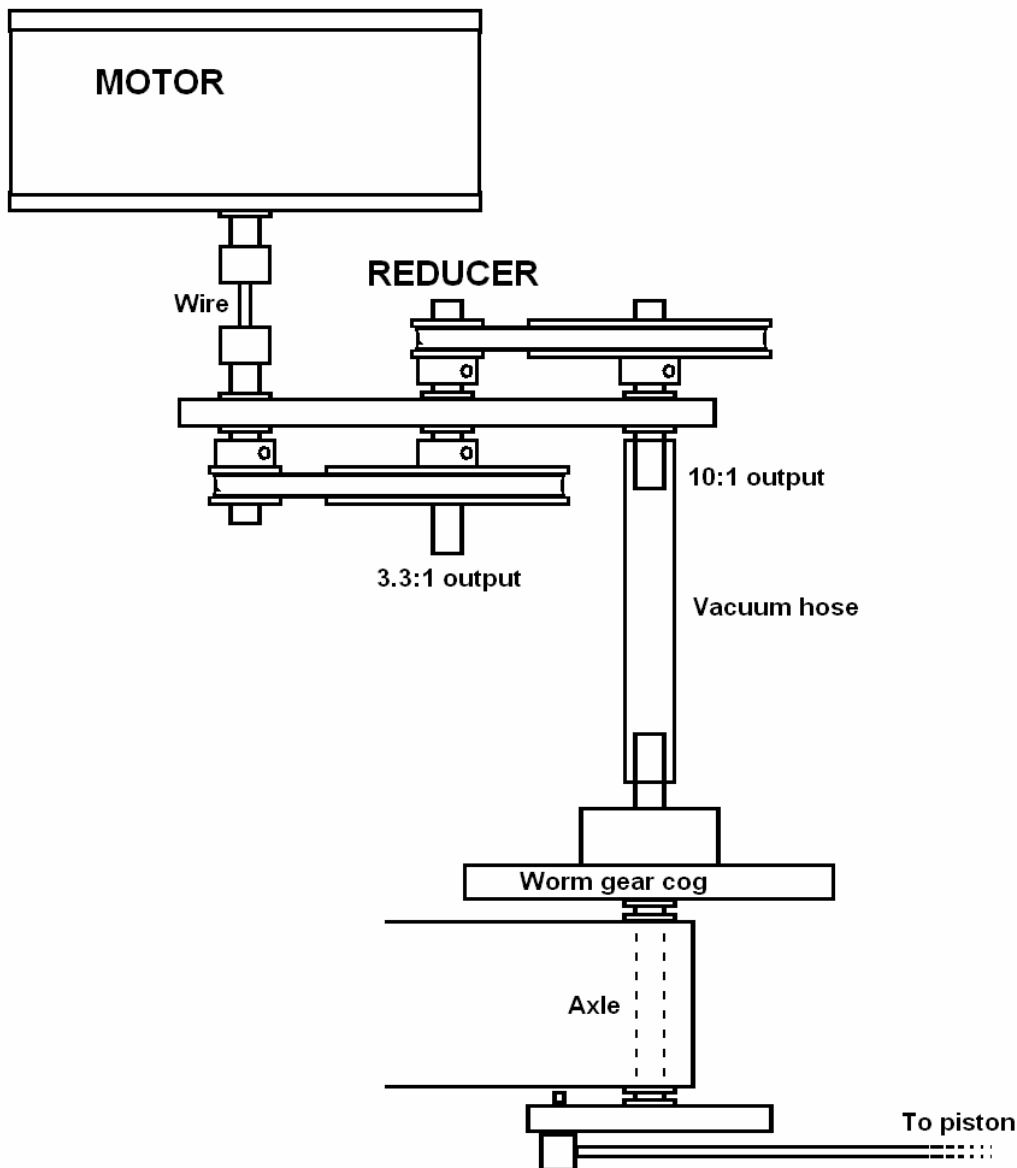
Top view of *low-direct* gearing configuration. The worm-gear has been removed, and the output of the reducer is connected via a vacuum hose directly to the axle. The hose is fixed to the shafts by un-pictured hose clamps. In this configuration, the resistance-clamp is opened so that no resistance is placed on the worm-gear cog.
